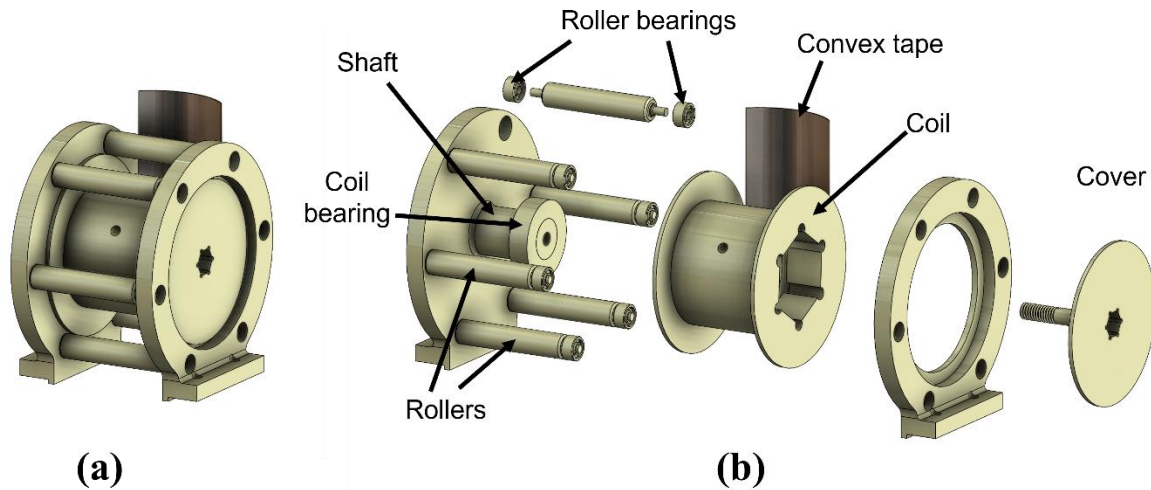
The coil assembly for the convex tapes for the boom: (a) assembled configuration, (b) exploded configuration.
